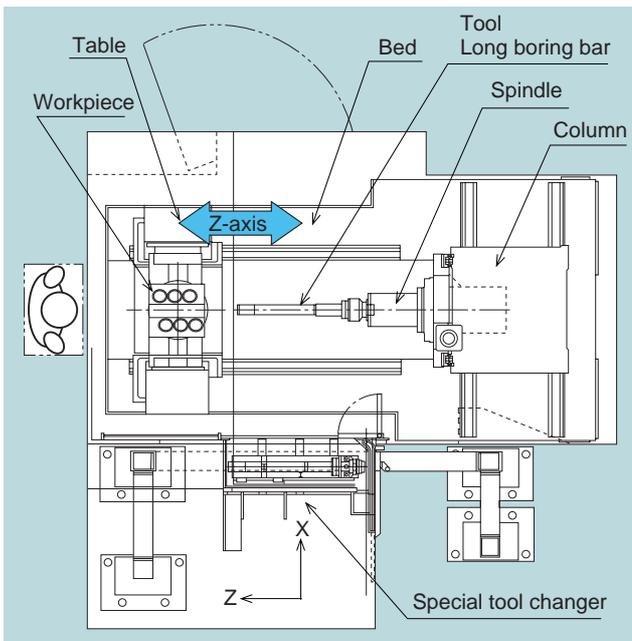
Structural diagram of machining cell for finish cutting cylinder blocks
